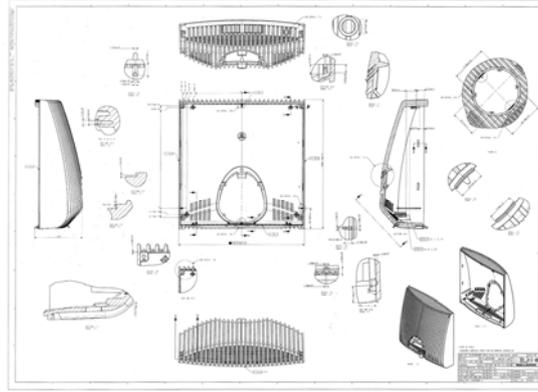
A technical drawing for the Bang & Olufsen CD player (Pipes 2007)
